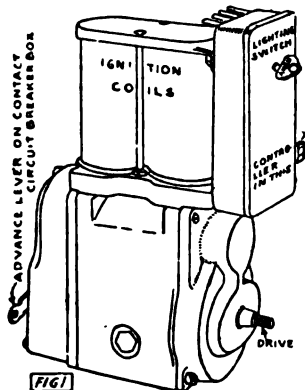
The electric generator with ignition breaker box, vacuum controller and ignition coils all in one unit.
